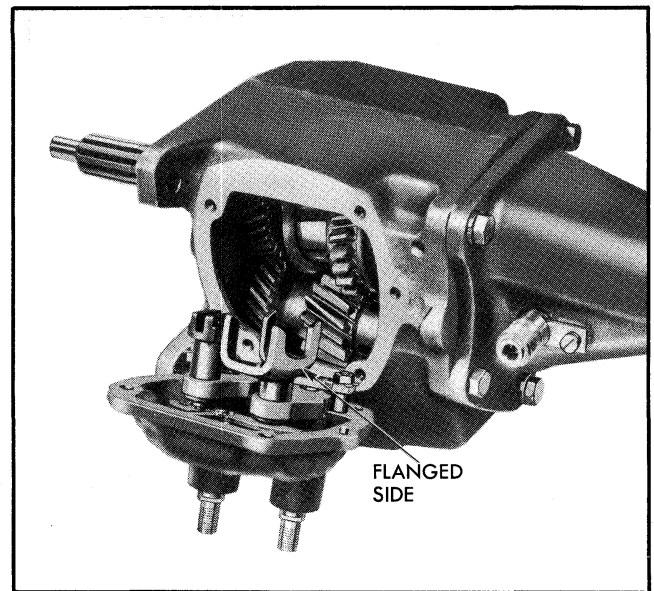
Positioning First and Reverse Shifter Fork in Transmission Side Cover
